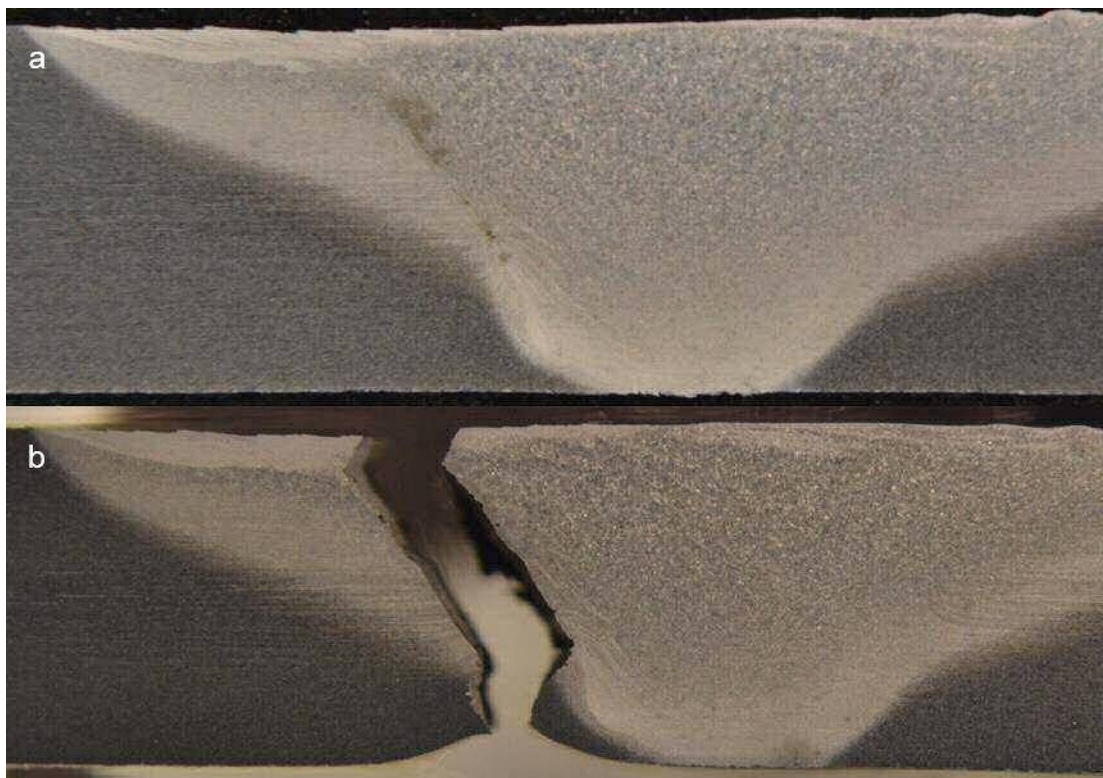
Macrograph of fast weld [Etched] (a) weld zone; (b) fatigue sample's fracture path (side view)
